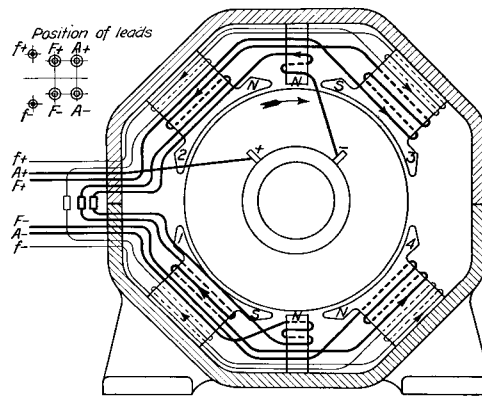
TYPE MC MOTOR FRAMES 20 TO 80 INCLUSIVE
